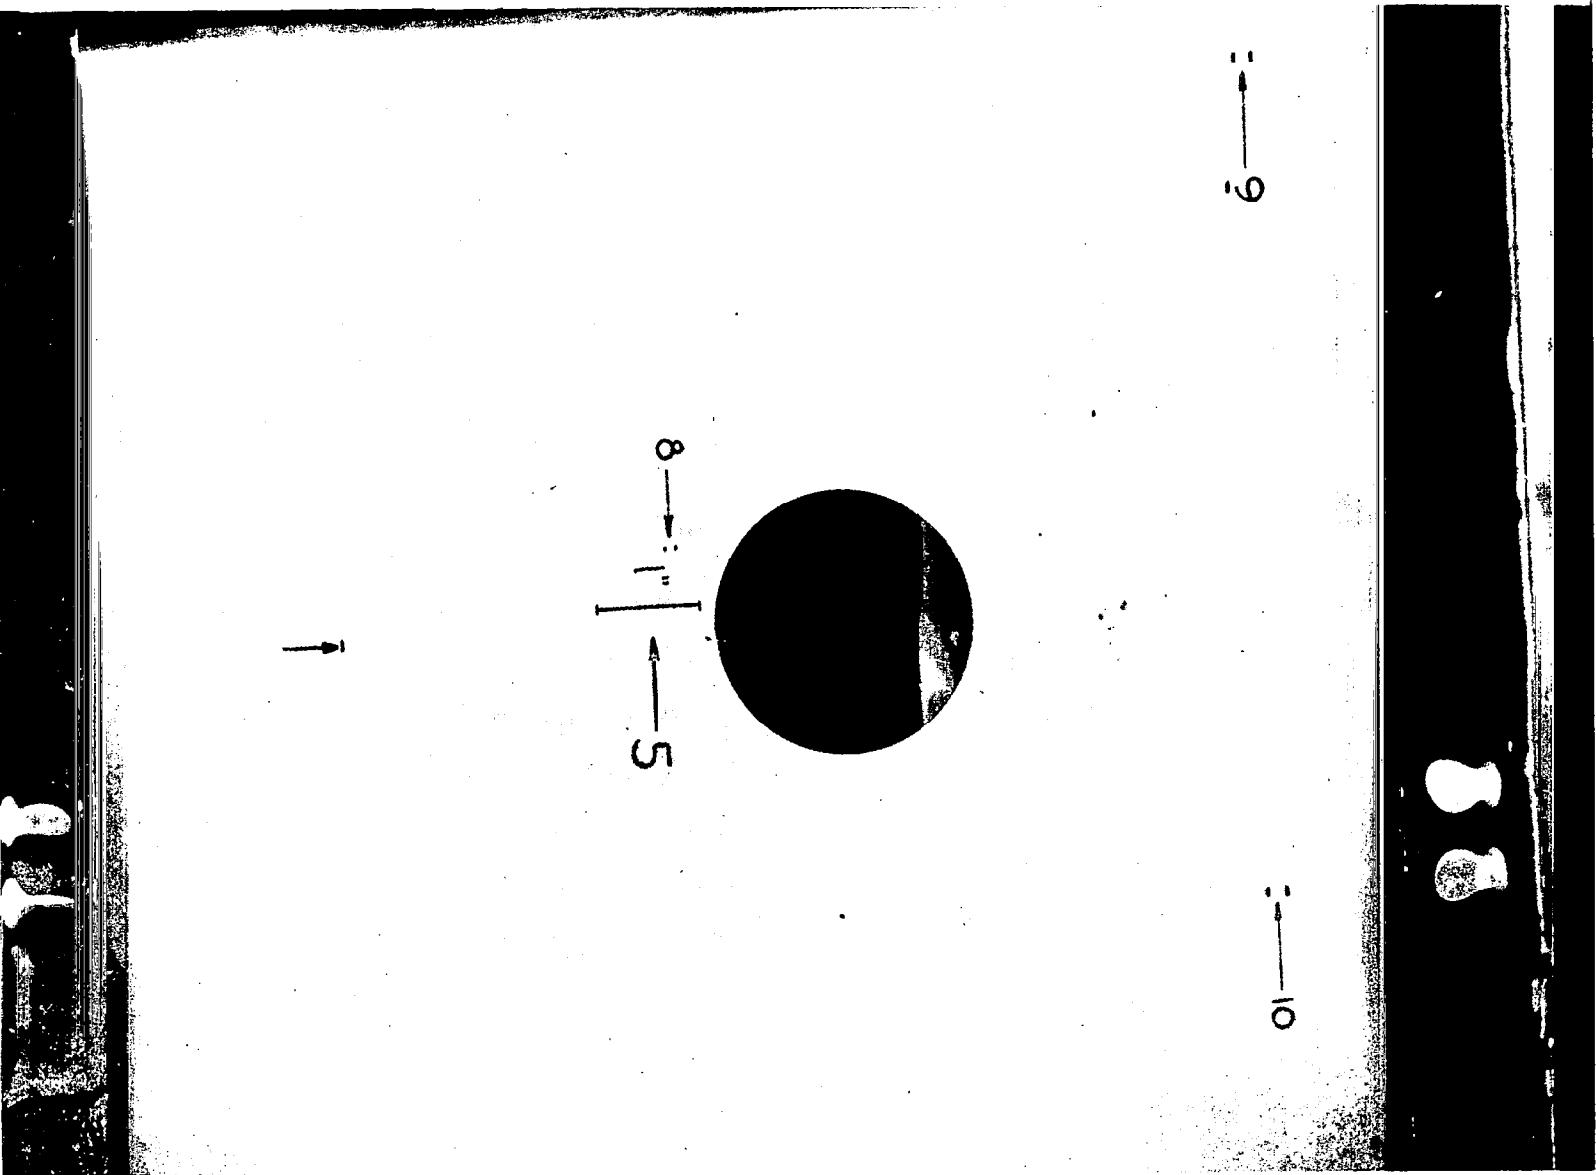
Photograph Showing Crack No. 5, Specimen No. 1
